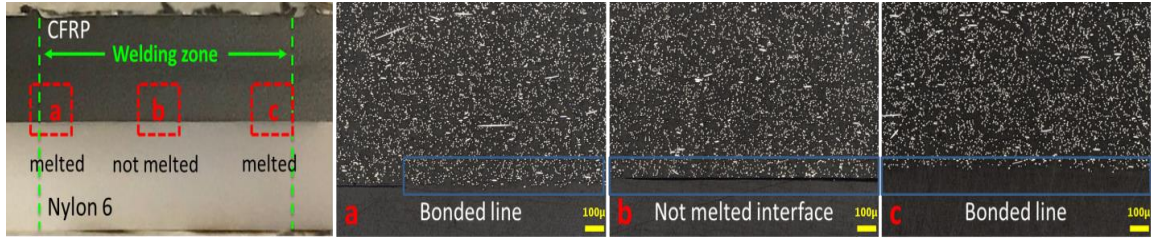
Cross section of the USW weld zone along the workpieces
